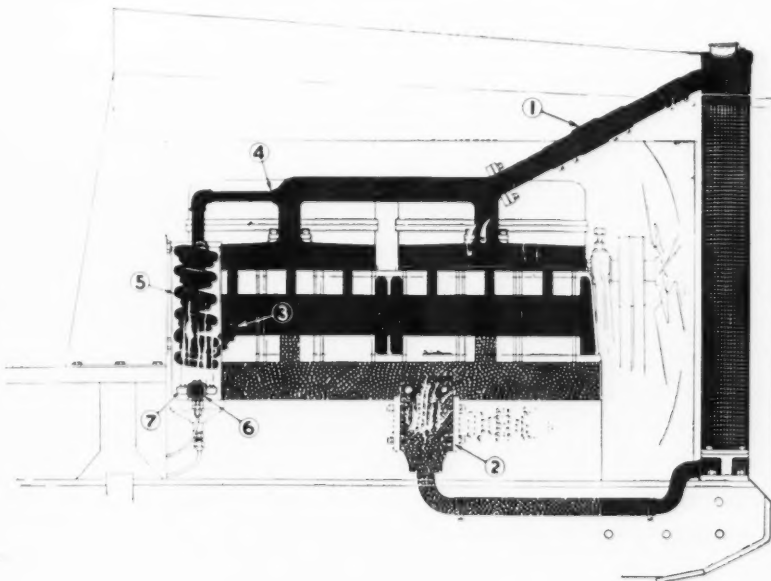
Engine is equipped with water heater to warm Diesel before starting in cold weather. (1) Thermostat; (2) Water Pump; (3) Inlet to Water Heater; (4) Hot water outlet from heater to engine; (5) Heater coils; (6) Heater control valve; (7) Burner.
